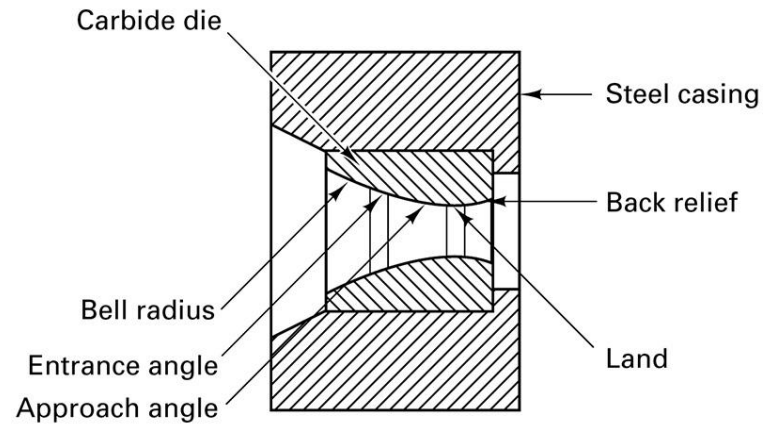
Cross section through a typical carbide wire-drawing die showing the characteristic regions of the contour.
